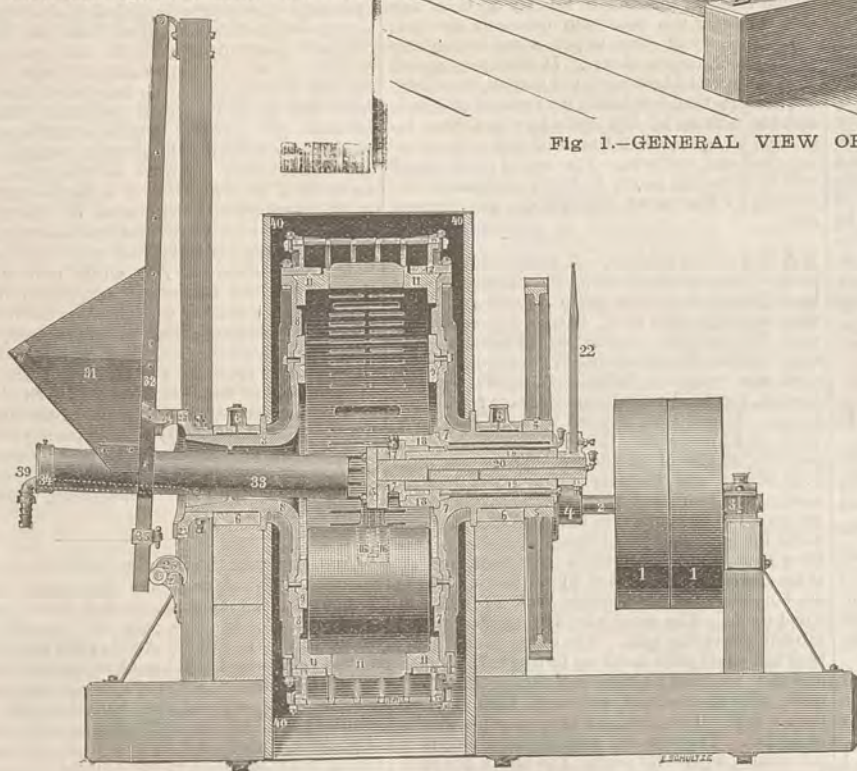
SECTIONAL VIEW AT RIGHT ANGLES TO Fig. 2.
